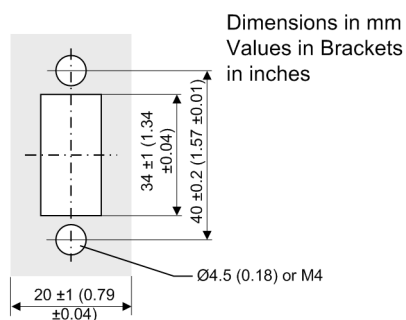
Dimensions of a detached operator panel for a 7SJ64 device
